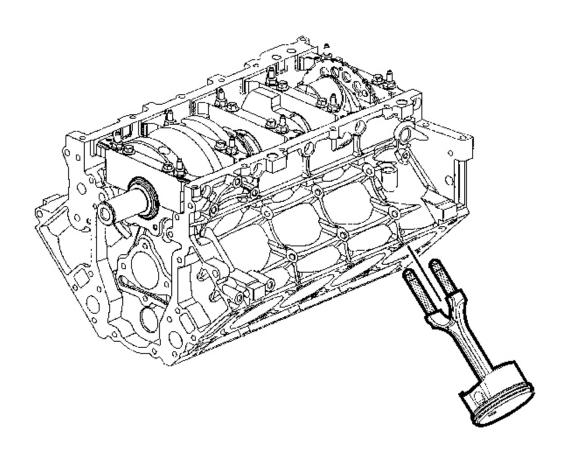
Piston, Connecting Rod & Cylinder Bore Courtesy of GENERAL MOTORS CORP.
